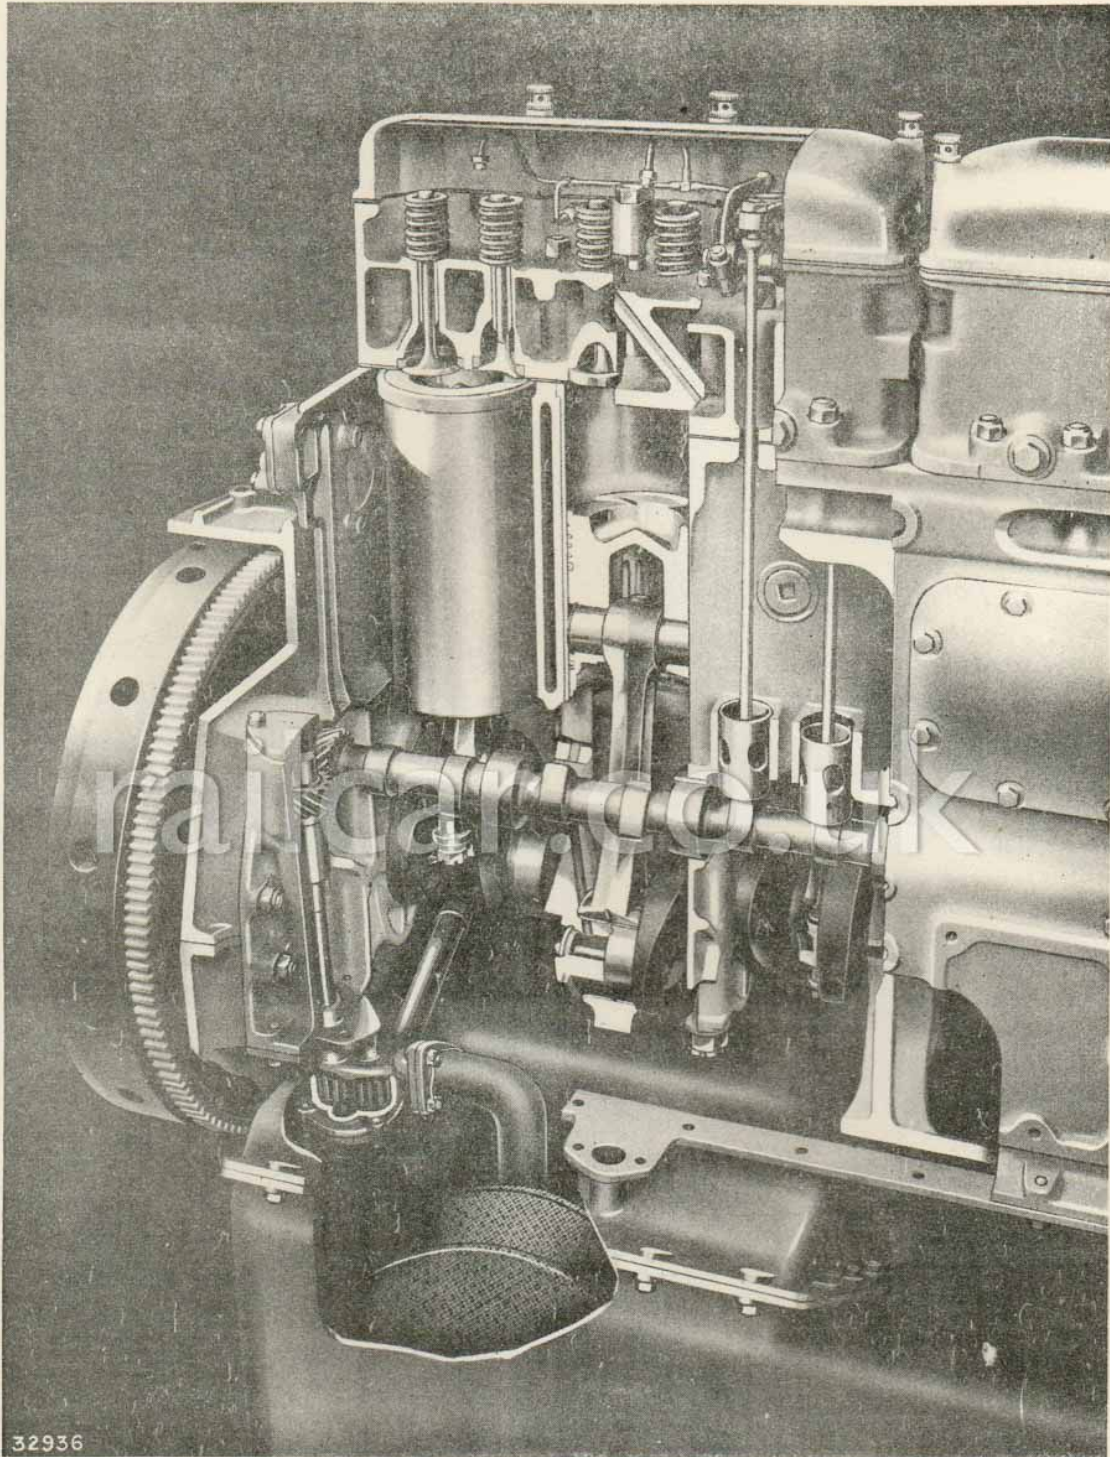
CUT-AWAY SECTION OF UNDERSIDE OF ENGINE.
